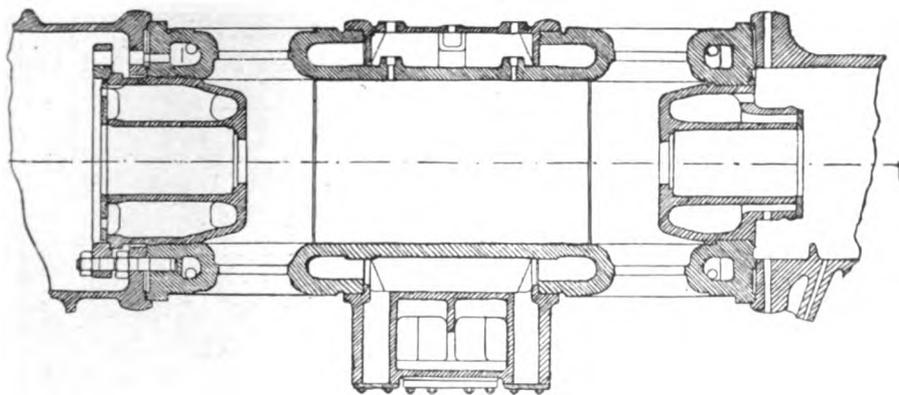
Section of Cylinder, Gasmotoren Fabrik Deutz.
